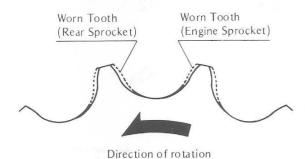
Sprocket tooth wear check (Sec 5)
